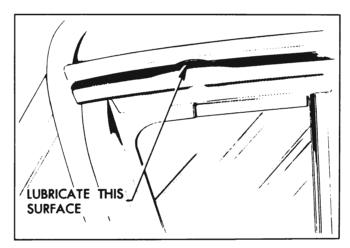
Lubrication of Side Roof Rail Mechanical Sealing Strip
